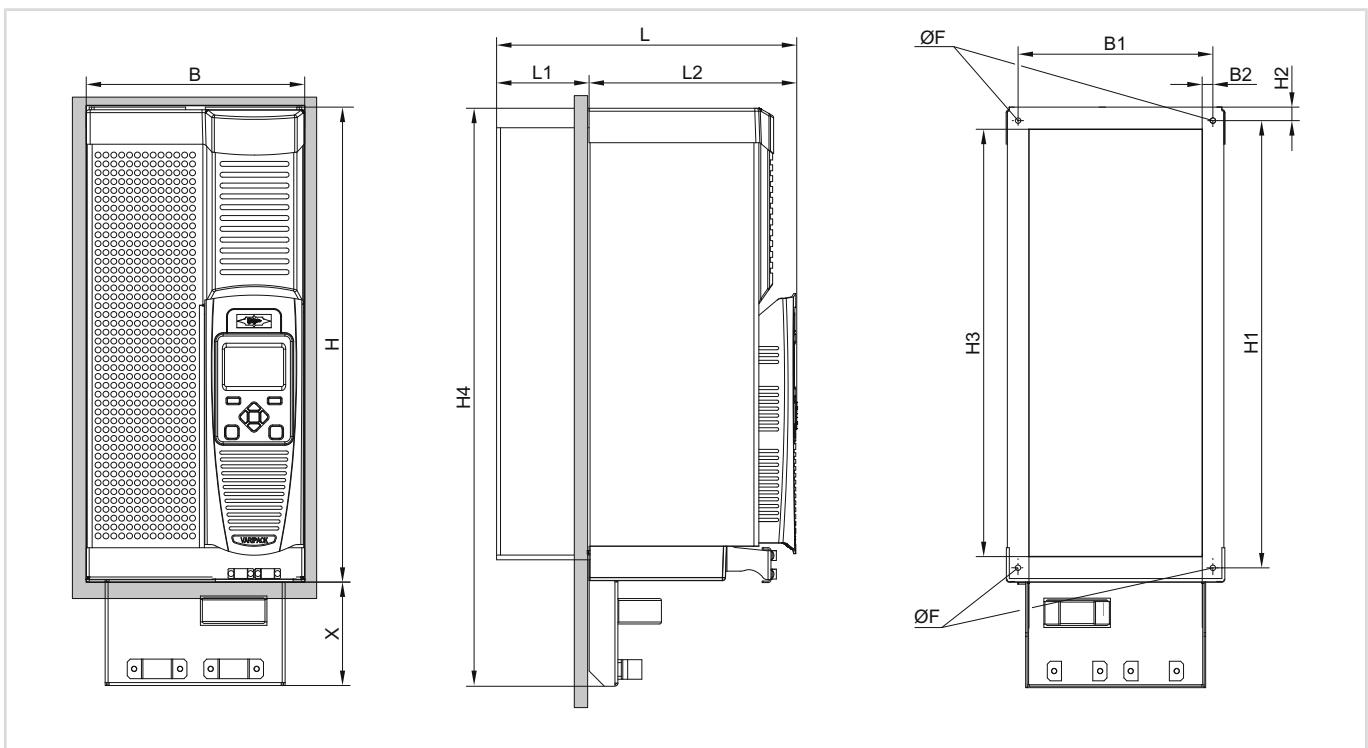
Dimensional drawing FEU+16 .. FHU+73 for through-switch cabinet mounting (with optional control panel)
